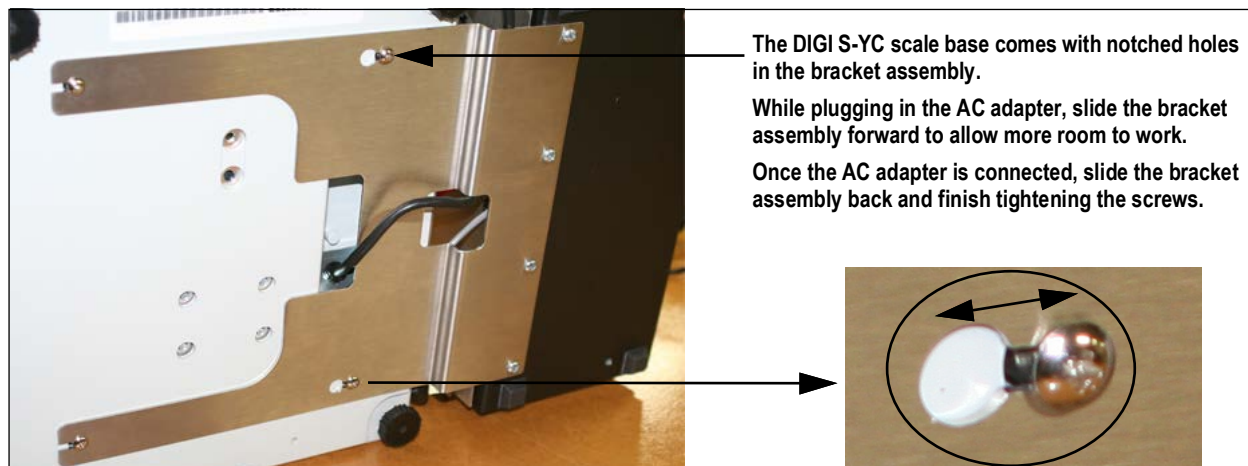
Attach Bracket Assembly to DIGI S-YC Scale Base
